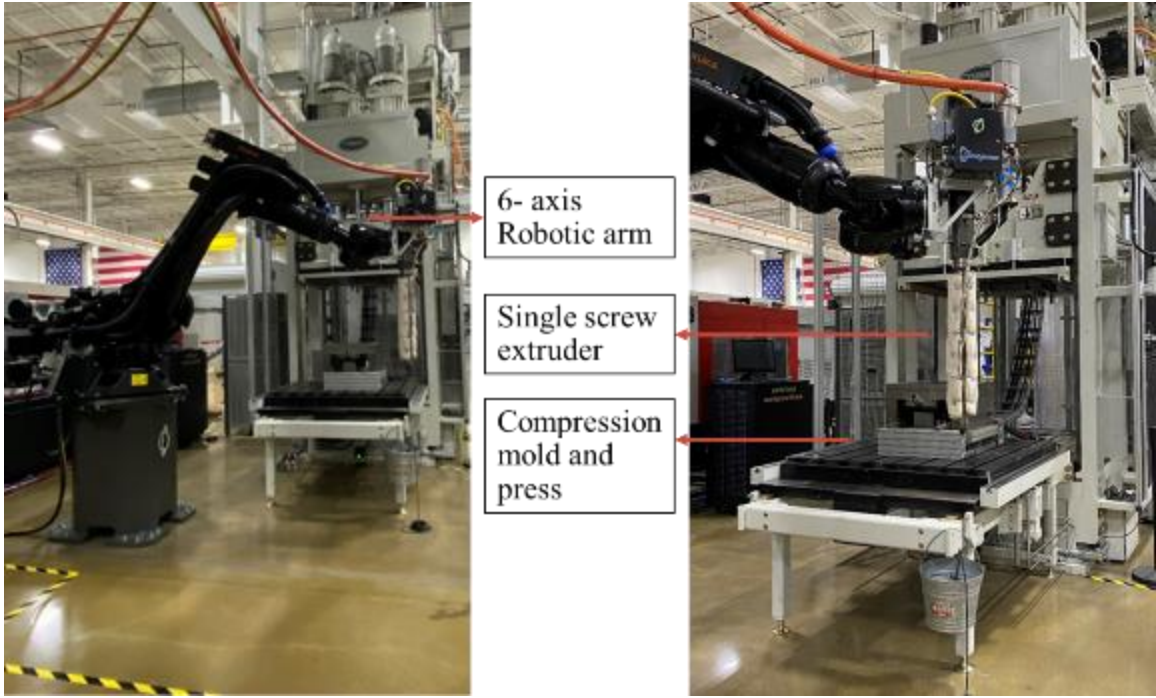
Large scale Additive manufacturing-compression molding setup showing the robotic arm, end effector single screw extruder, compression mold and press. The bonded magnet pellets are printed using the extruder end effector directly into the mold cavity. The linear bearings move the cavity into position inside the compression press for the compaction cycle.
